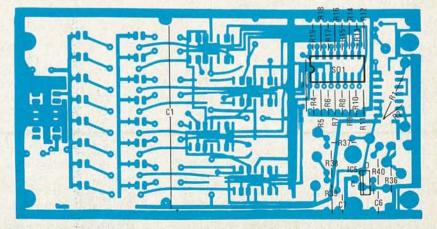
PARTS PLACEMENT on "foil-side" of display board. Resistor R2 (at right) is soldered to pads on opposite sides of board.
